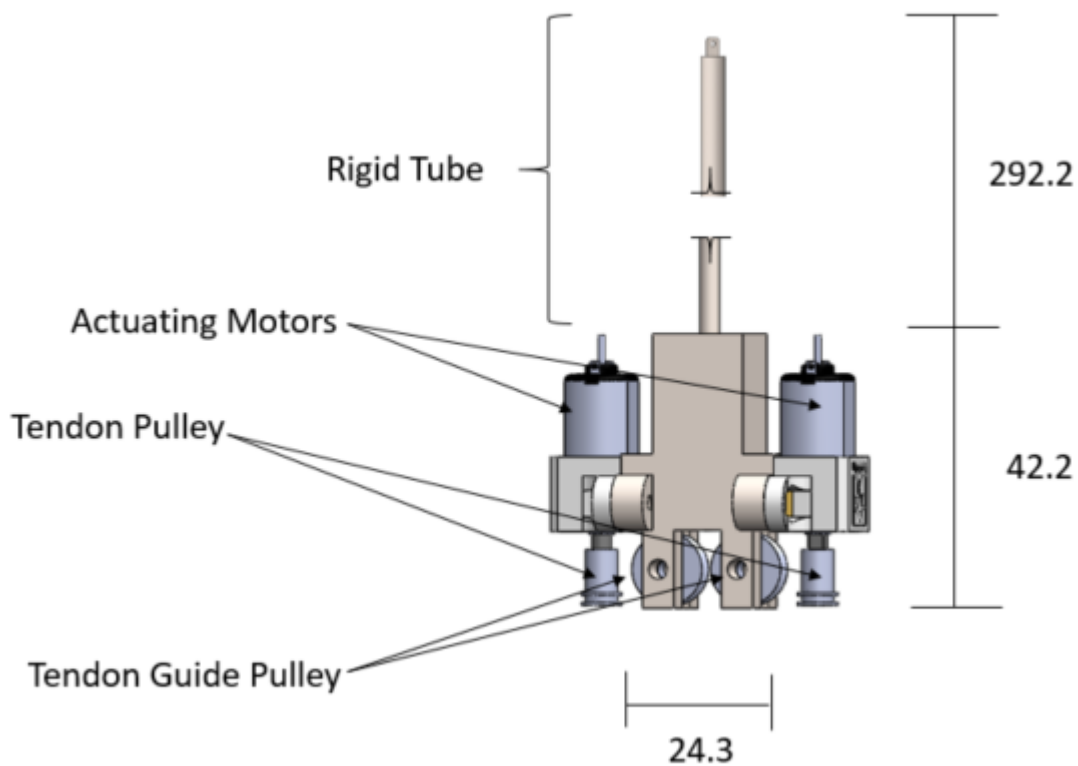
3D Design Model of the Rigid tube and Overall Dimensions in mm
